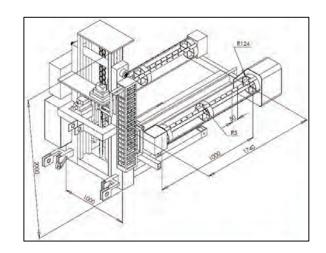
The isometric drawing of a Sugarcane Leaf Pruning Machine
